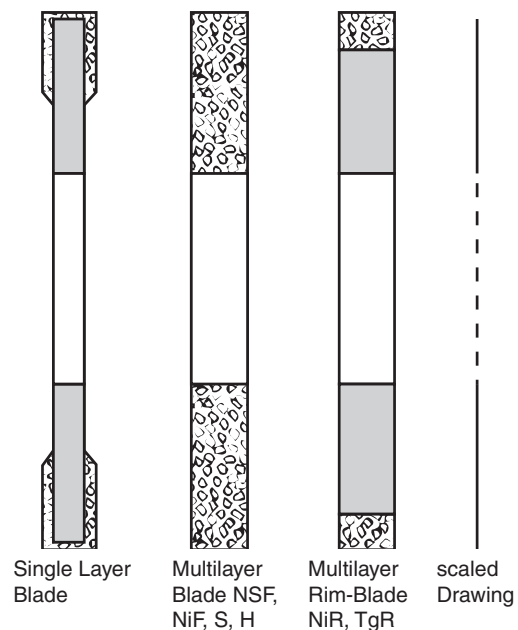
Types of Blades: The thicknesses are oversized. Correctly scaled drawing on the right.
